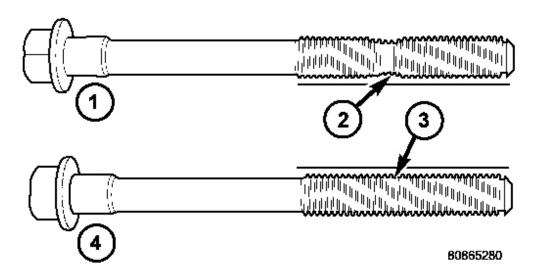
Checking Cylinder Head Bolts For Stretching (Necking)
